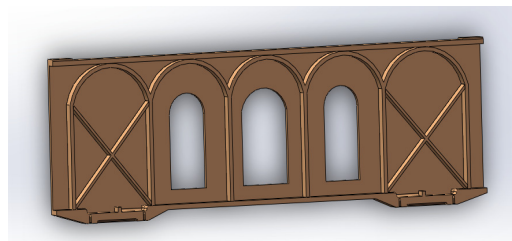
Cross-sectional view of the bionic crossbeam (Model II)
